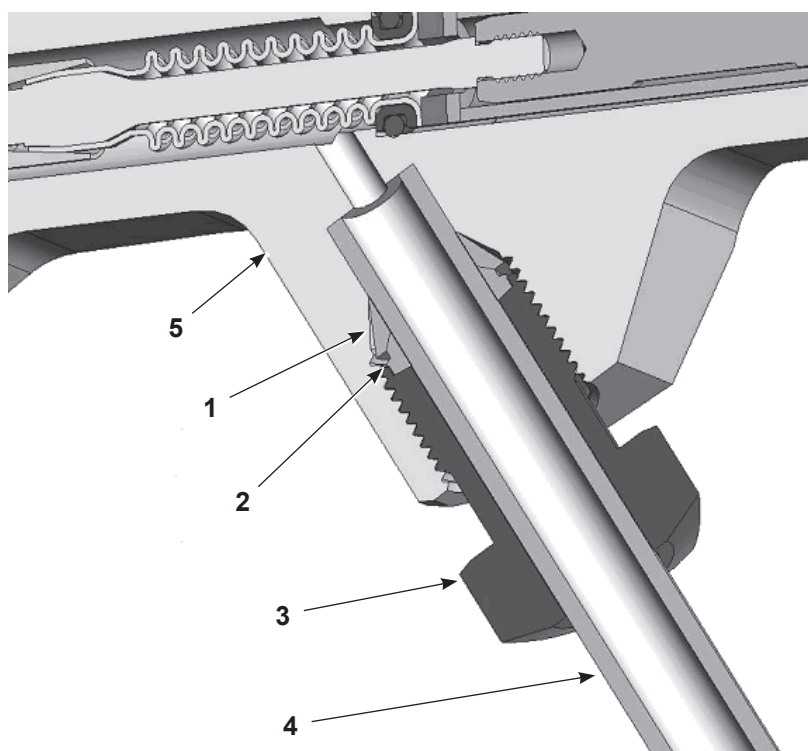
Connecting Fluid Tubing to Spray Gun
